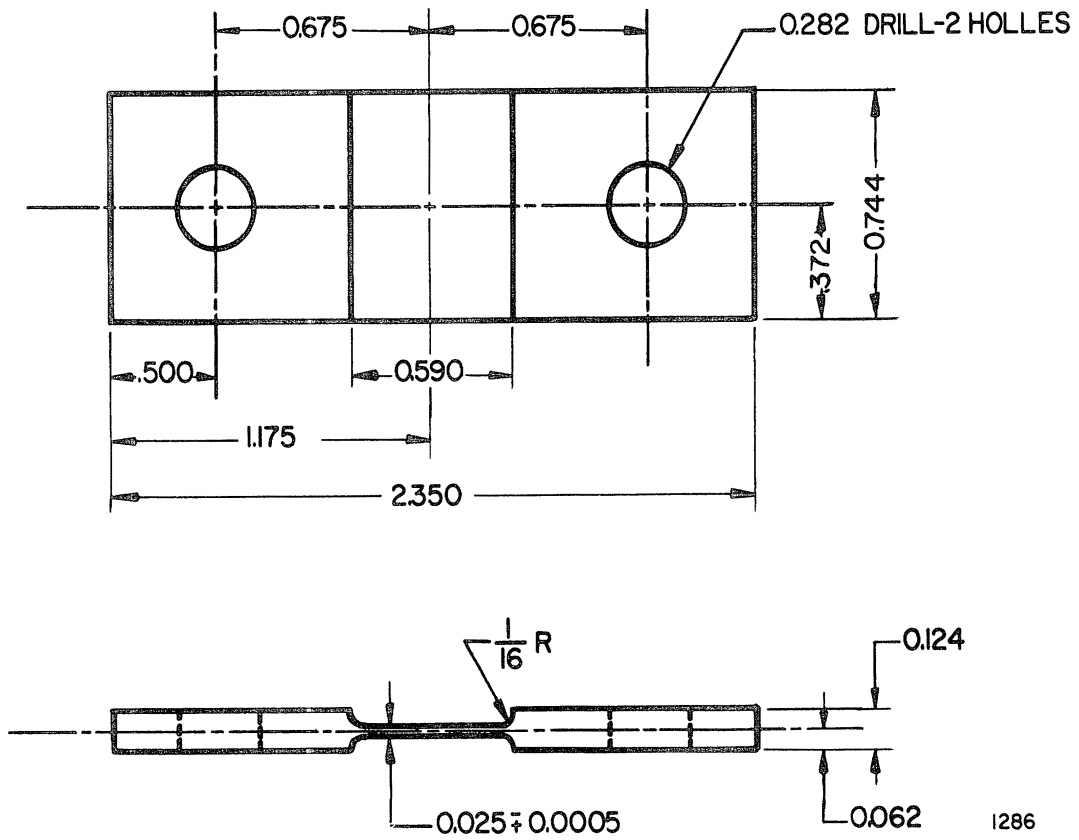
Dimensional Drawing of Tensile Test Specimen
